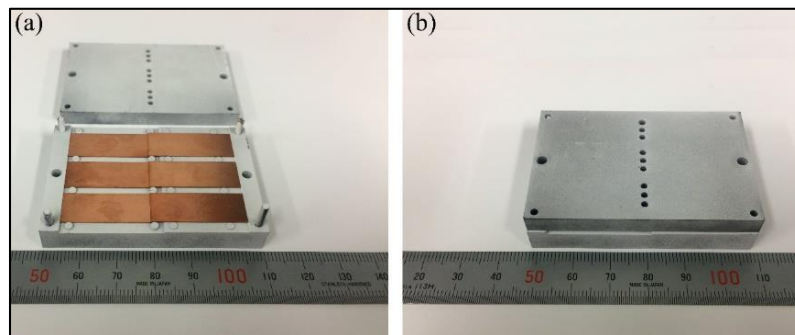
Specimens assembling: (a) Specimen prepared on fixture and (b) Covered loading pressure.
